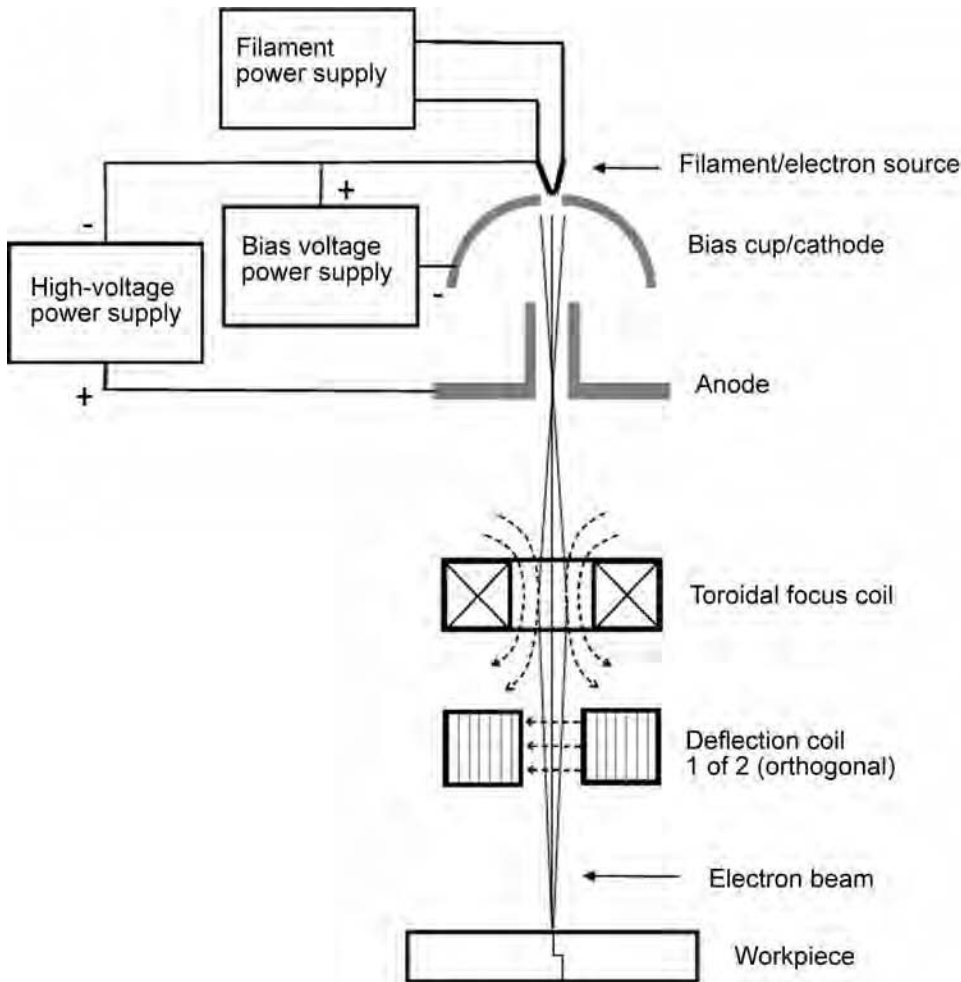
Schematic drawing showing primary components of an electron beam welding head with a triode-style gun assembly
